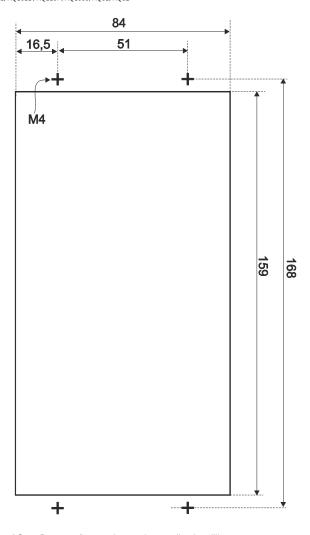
AQ110P cut out for panel mounting, scaling in millimeter.
